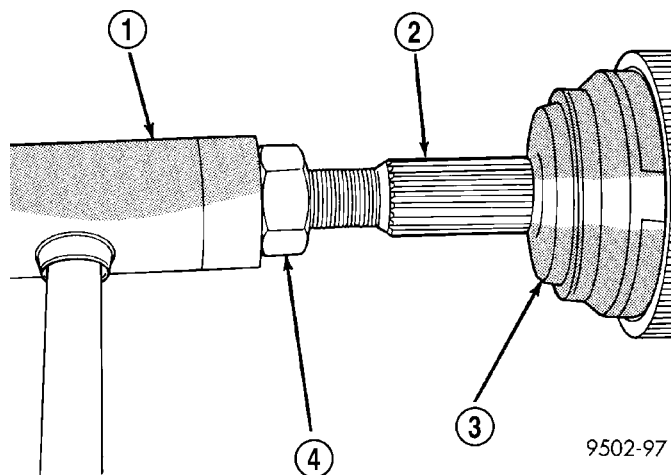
Outer C/V Joint Installation on Interconnecting Shaft
